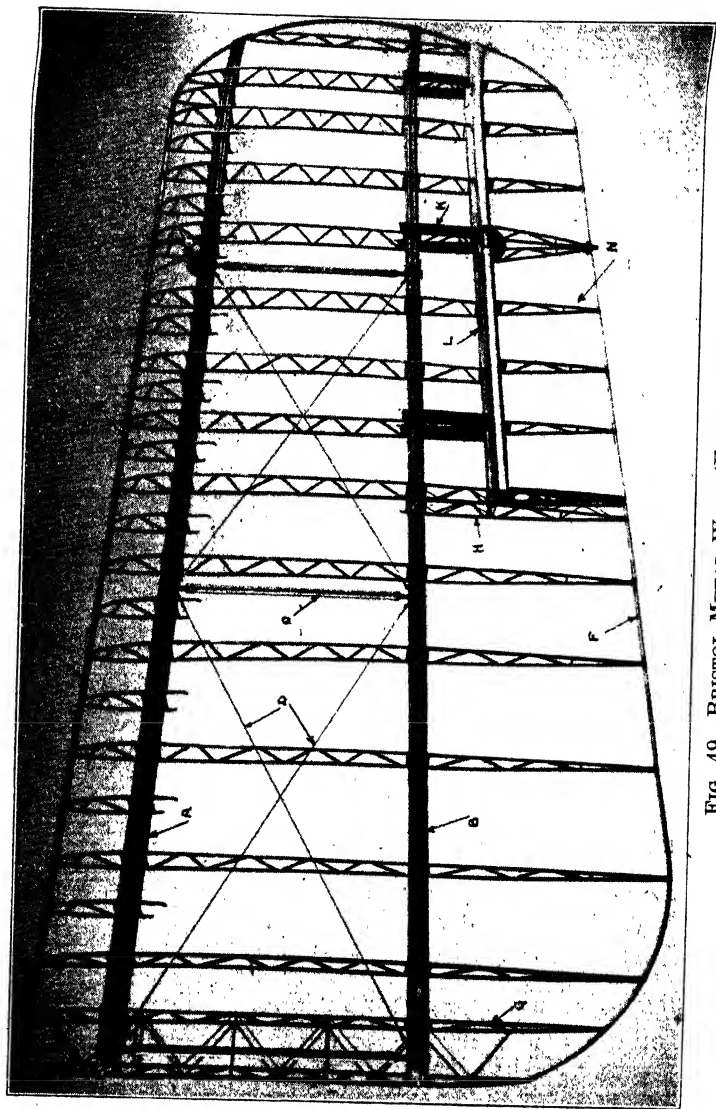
BRISTOL METAL WING (EARLY TYPE)
